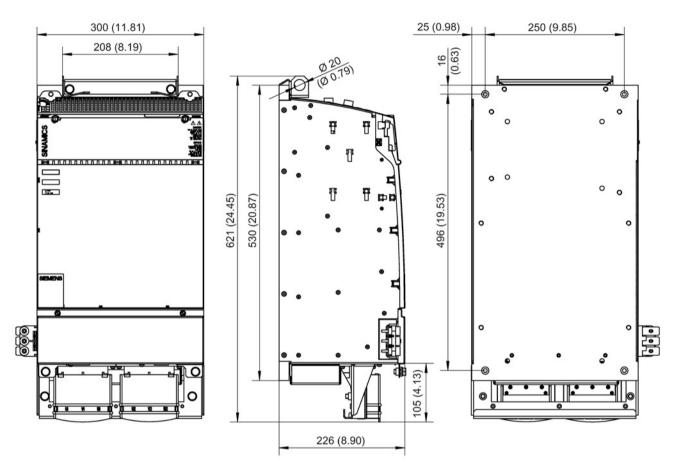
Dimension drawing HF Choke Module, all data in in mm (inches)
